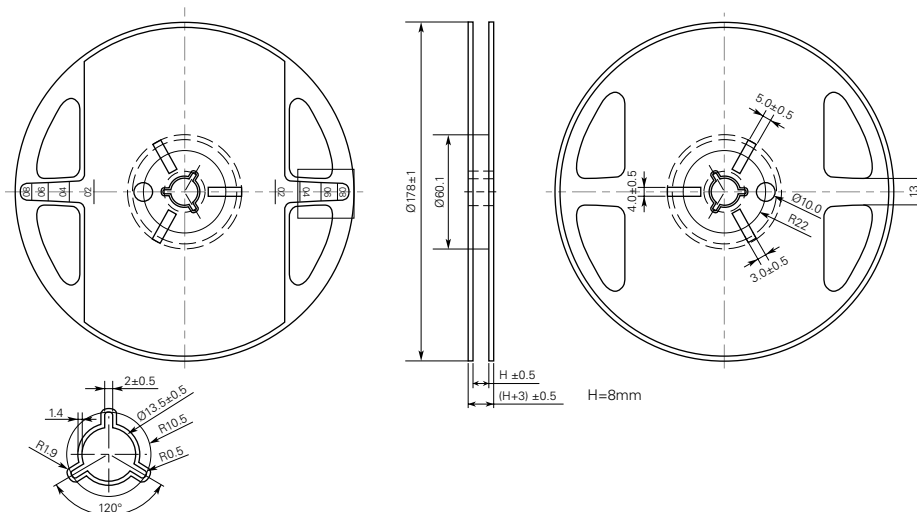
EIA Referenced Taped Component Dimensions for ZENxxxVyyyAzzYC Devices in Millimeters (mm)
